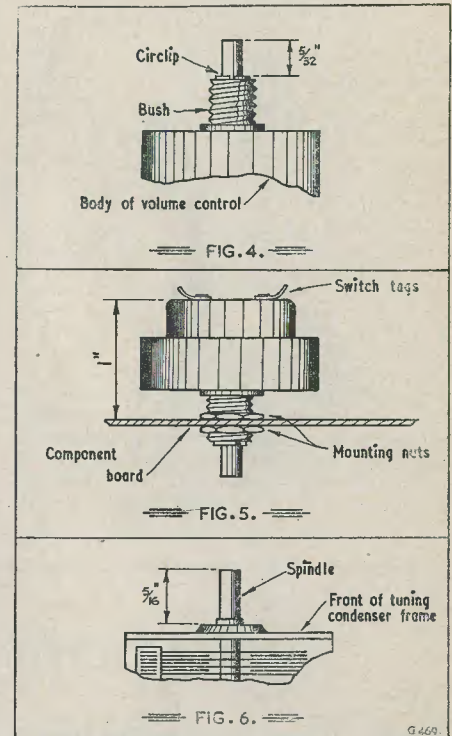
The spindle of the volume control should have the dimension illustrated here. Fig. 5. How the volume control is fitted to the component board. Fig. 6. The correct length for the tuning condenser spindle.
